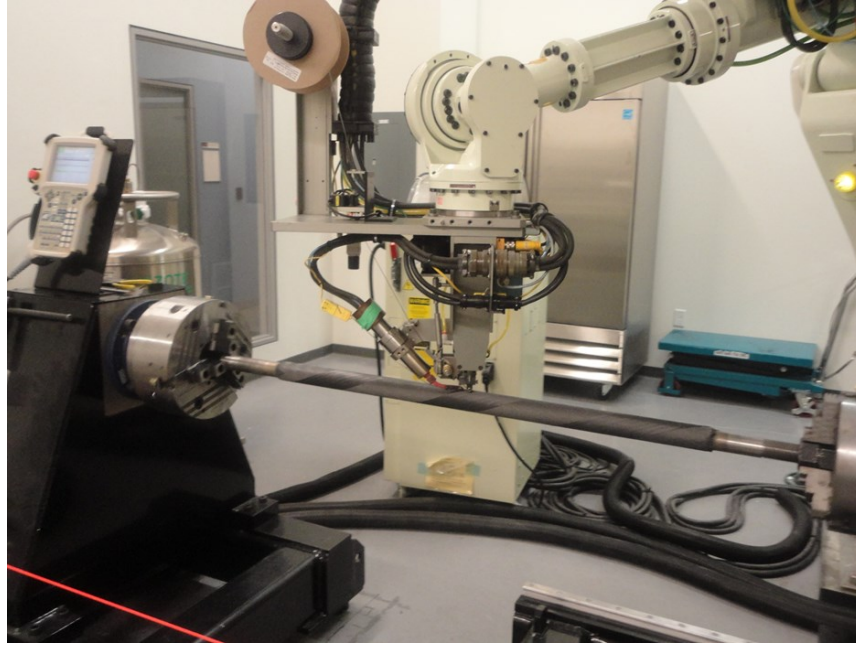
Manufacturing of the thermoplastic composite tube using a robotic AFP machine
